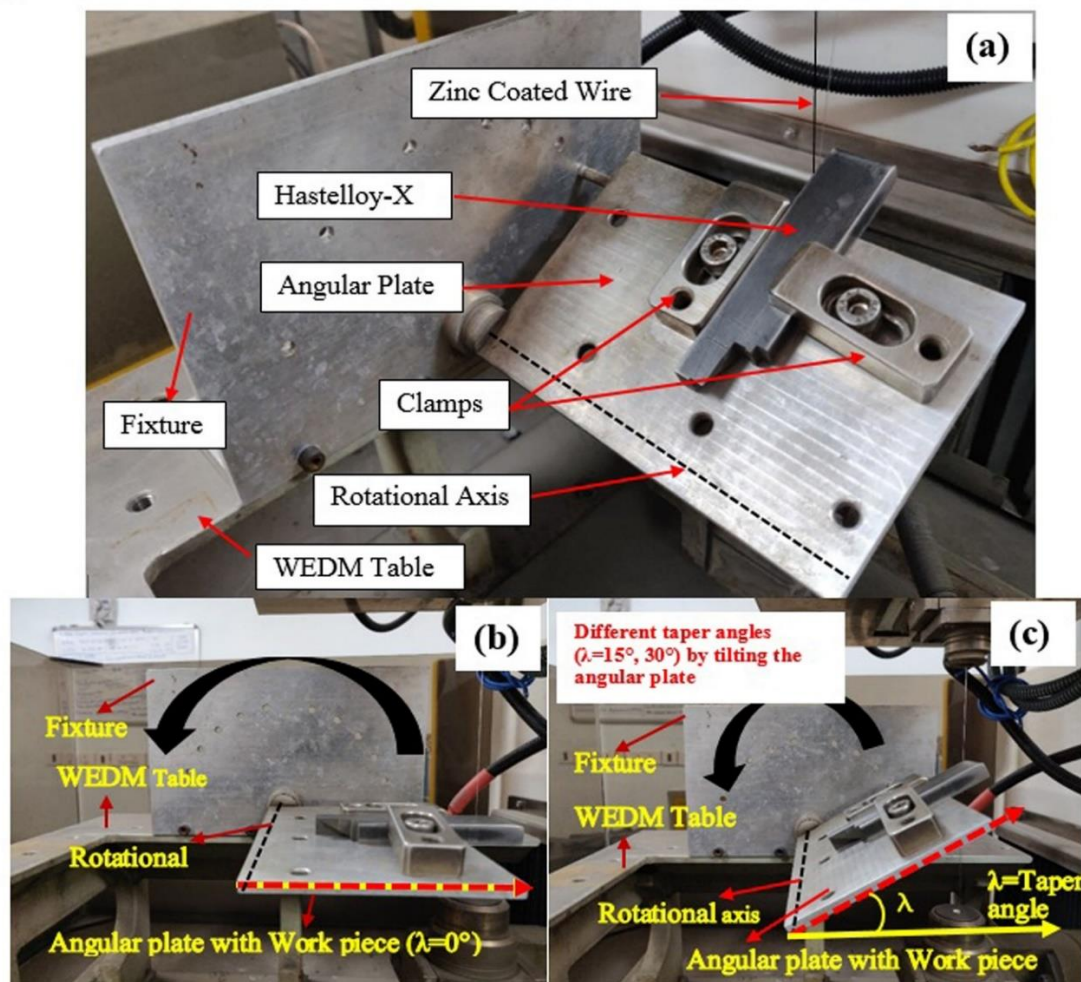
(a) Fixture fixed to WEDM table, fixture position at (b) 0° taper angle (c) 15° or 30° taper angle
